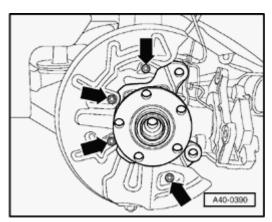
Removing/Installing Bolts And Cover Plate Courtesy of VOLKSWAGEN UNITED STATES, INC.
